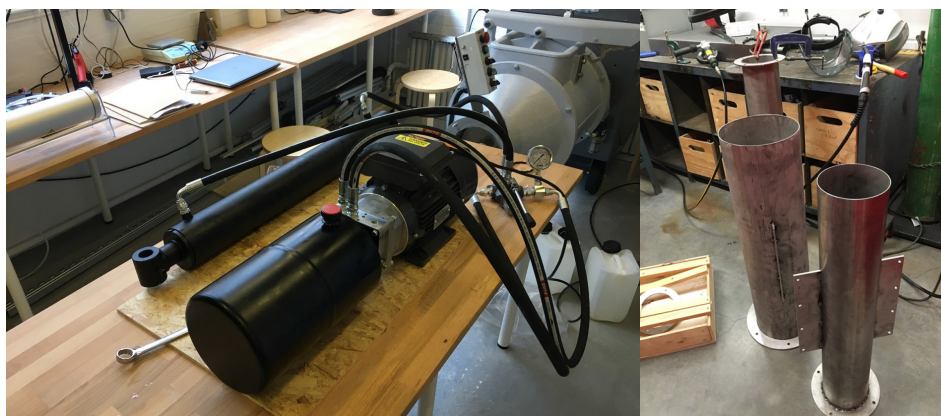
The hydraulic power unit on the left, with stainless steel tubes being fitted with flanges and brackets in the image to the right. Photos: T. Jorgensen, 2020.
